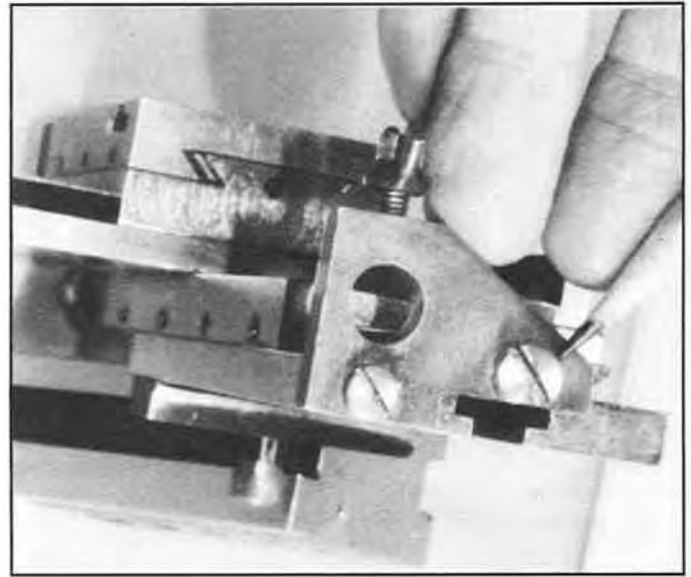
Cross-slide gauge bracket in place. Note the screw head conflicts with the T-slot; the head was modified.
